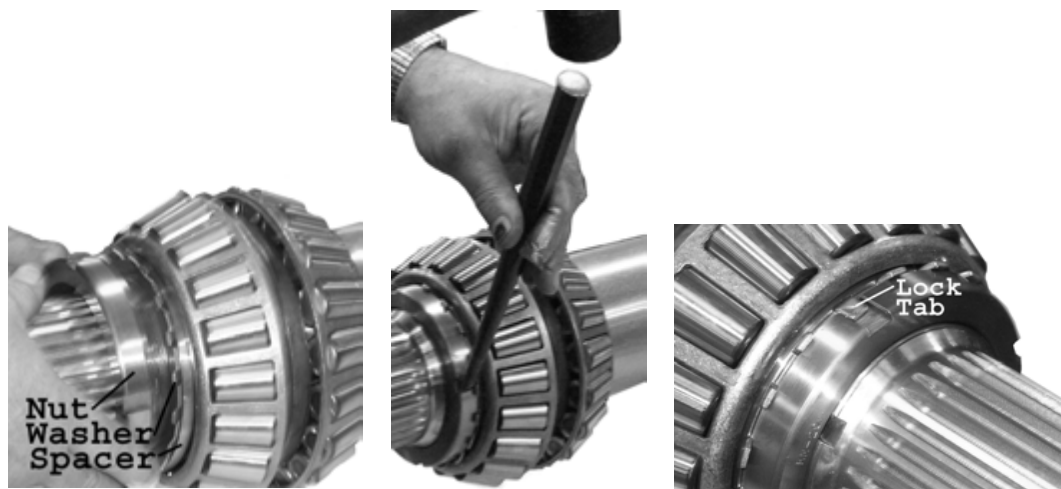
Install Washer and Locking Nut (left), Tighten Nut (center), and Bend Tab Into Slot (right)
